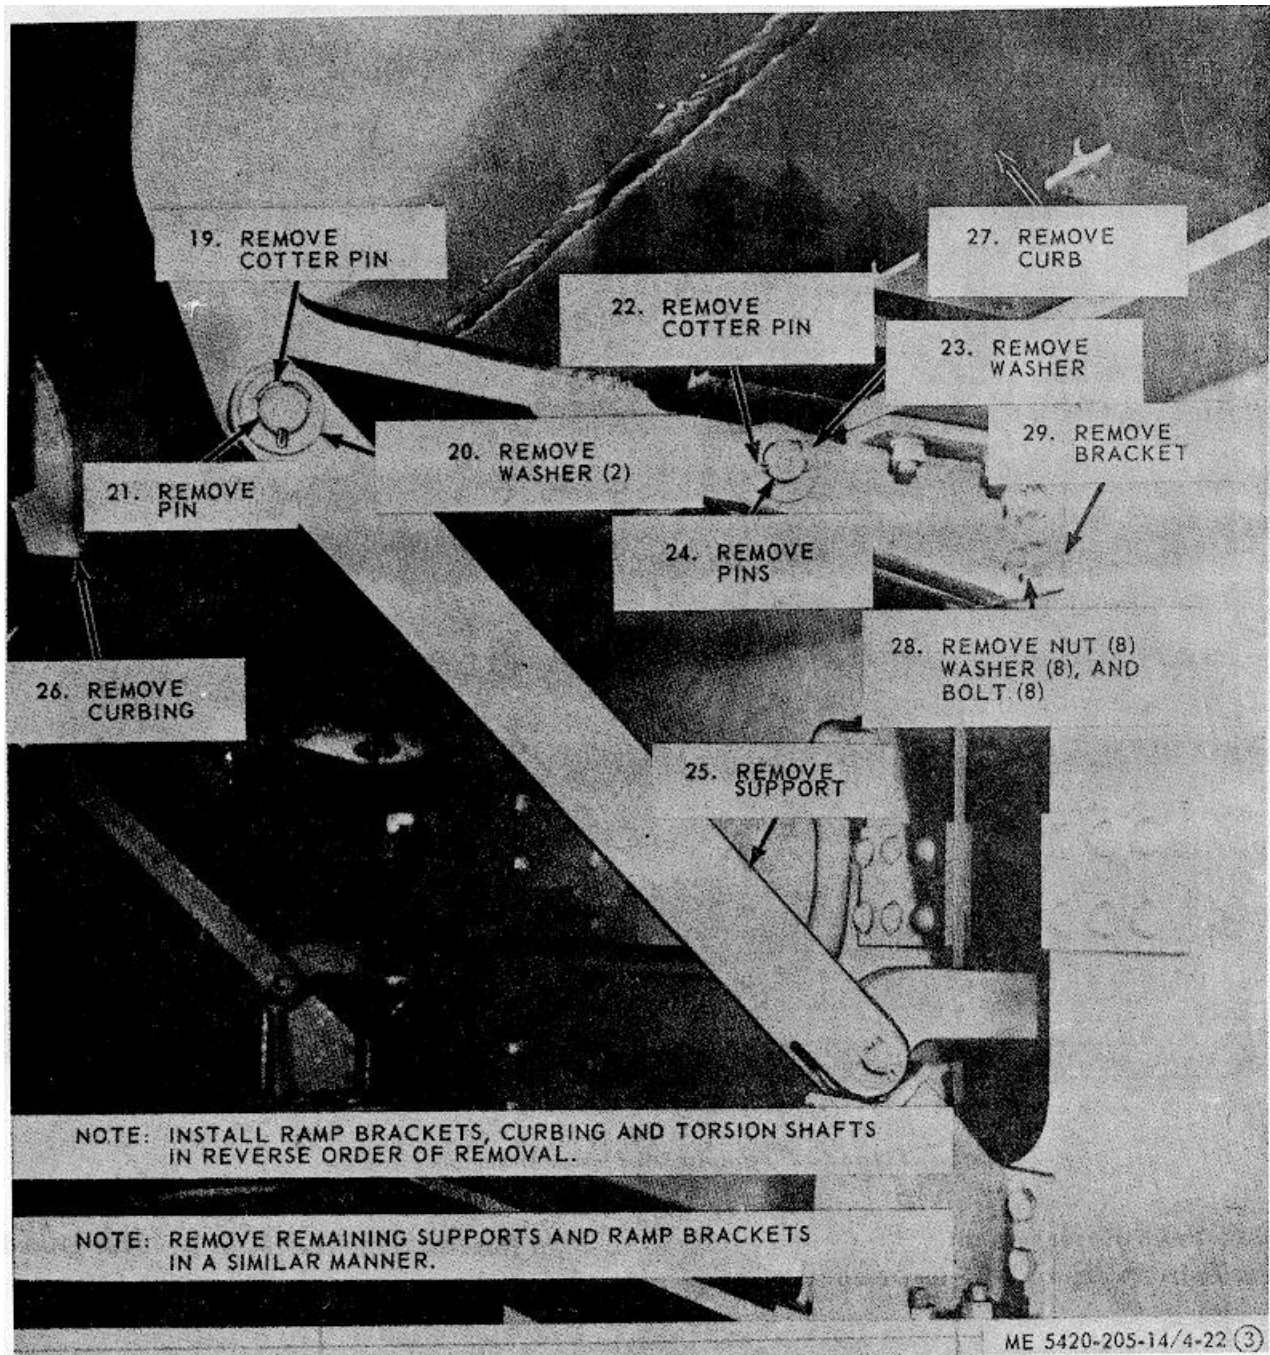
Curbing and torsion shaft, and ramp bracket, removal and installation. (sheet 3 of 3)
